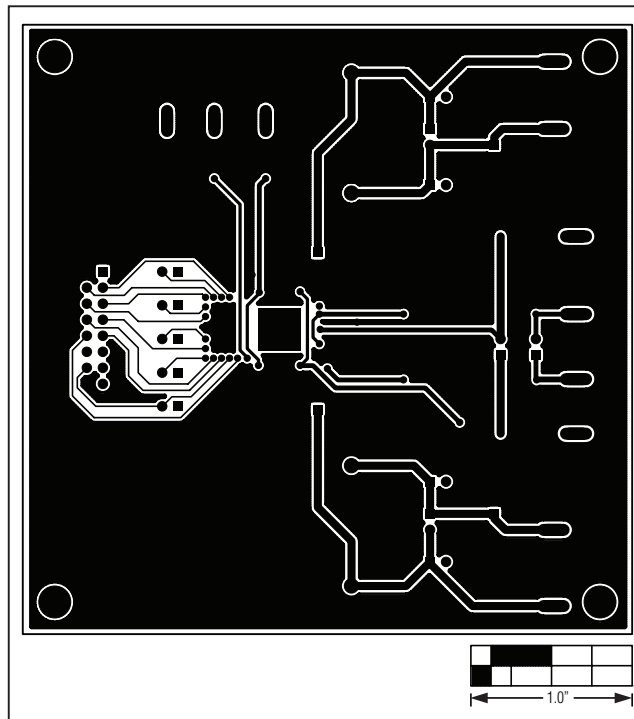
MAX4940 EV Kit PCB Layout—Solder Side
